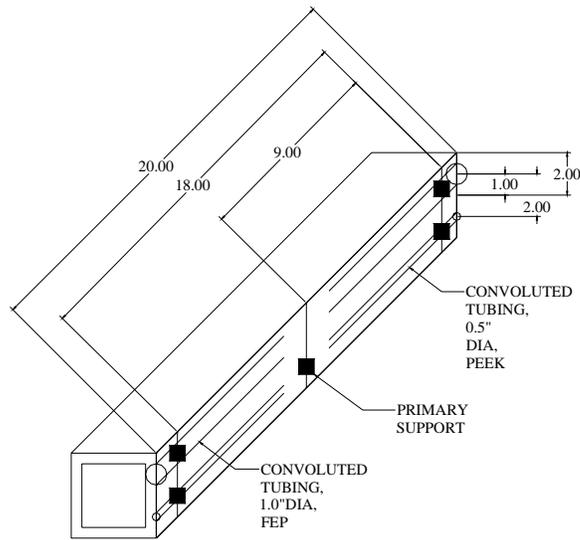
Test fixture construction illustrating the 2 different cable harnesses with mounting configurations.
